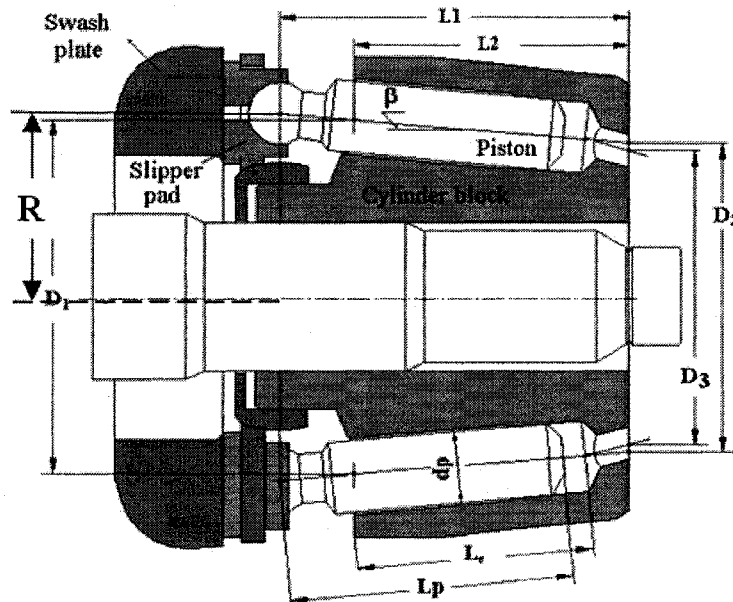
General dimensions of a swash plate axial piston pump with a conical cylinder block
